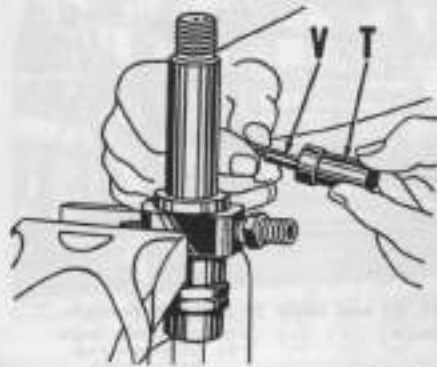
Removing Massey-Harris Diesel engine spray nozzle tip (T) and the valve (V).
